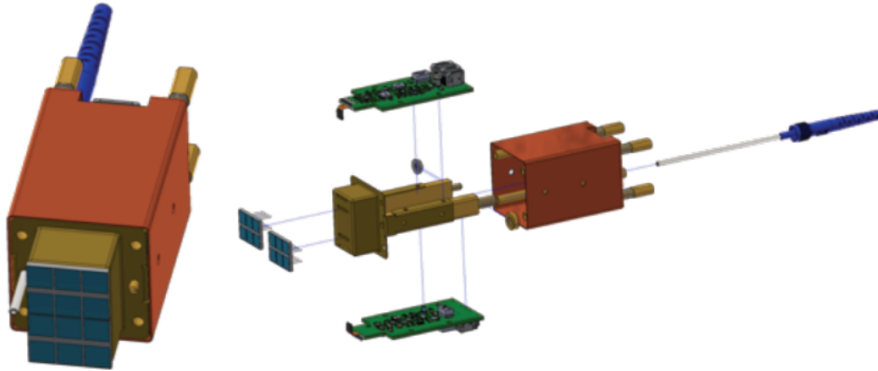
Left: assembly of the FEE holder. Right: exploded view of the FEE holder with all the components. Two SiPMs glued on the inner copper support, FEE AMP-HV boards, Faraday cage and needle for insertion of the optical fiber.
